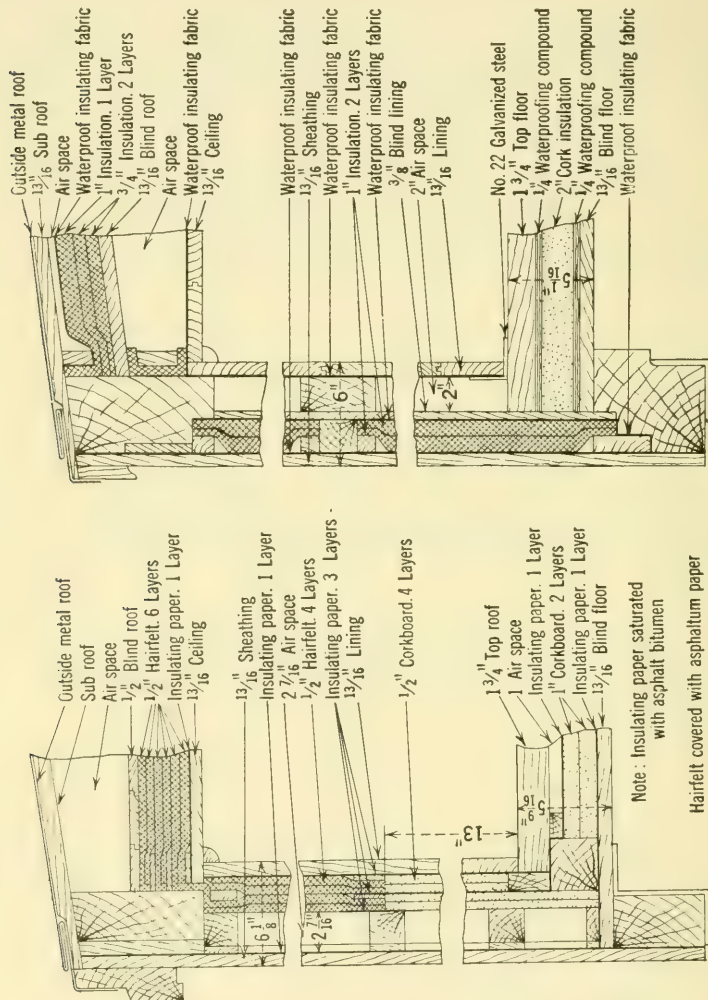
and 307.—Insulation of Refrigerator Cars.
